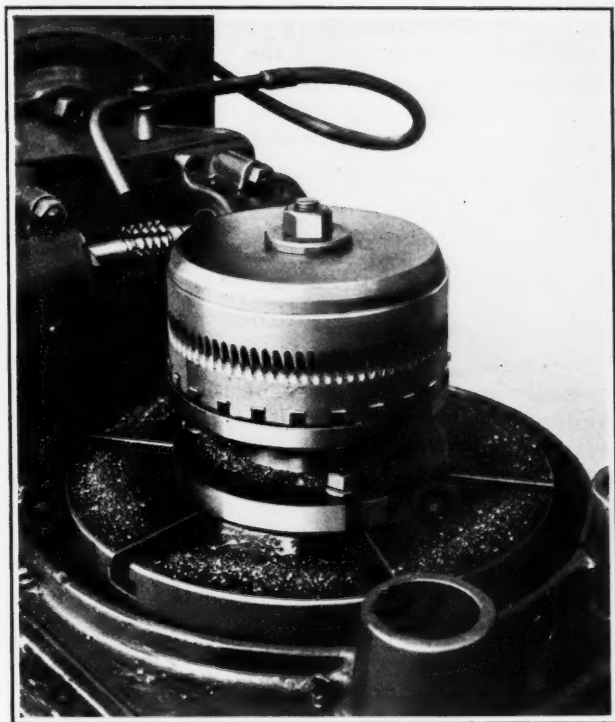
Cutting Slots in Rim on a Hand Milling Machine Having an Indexing Fixture
